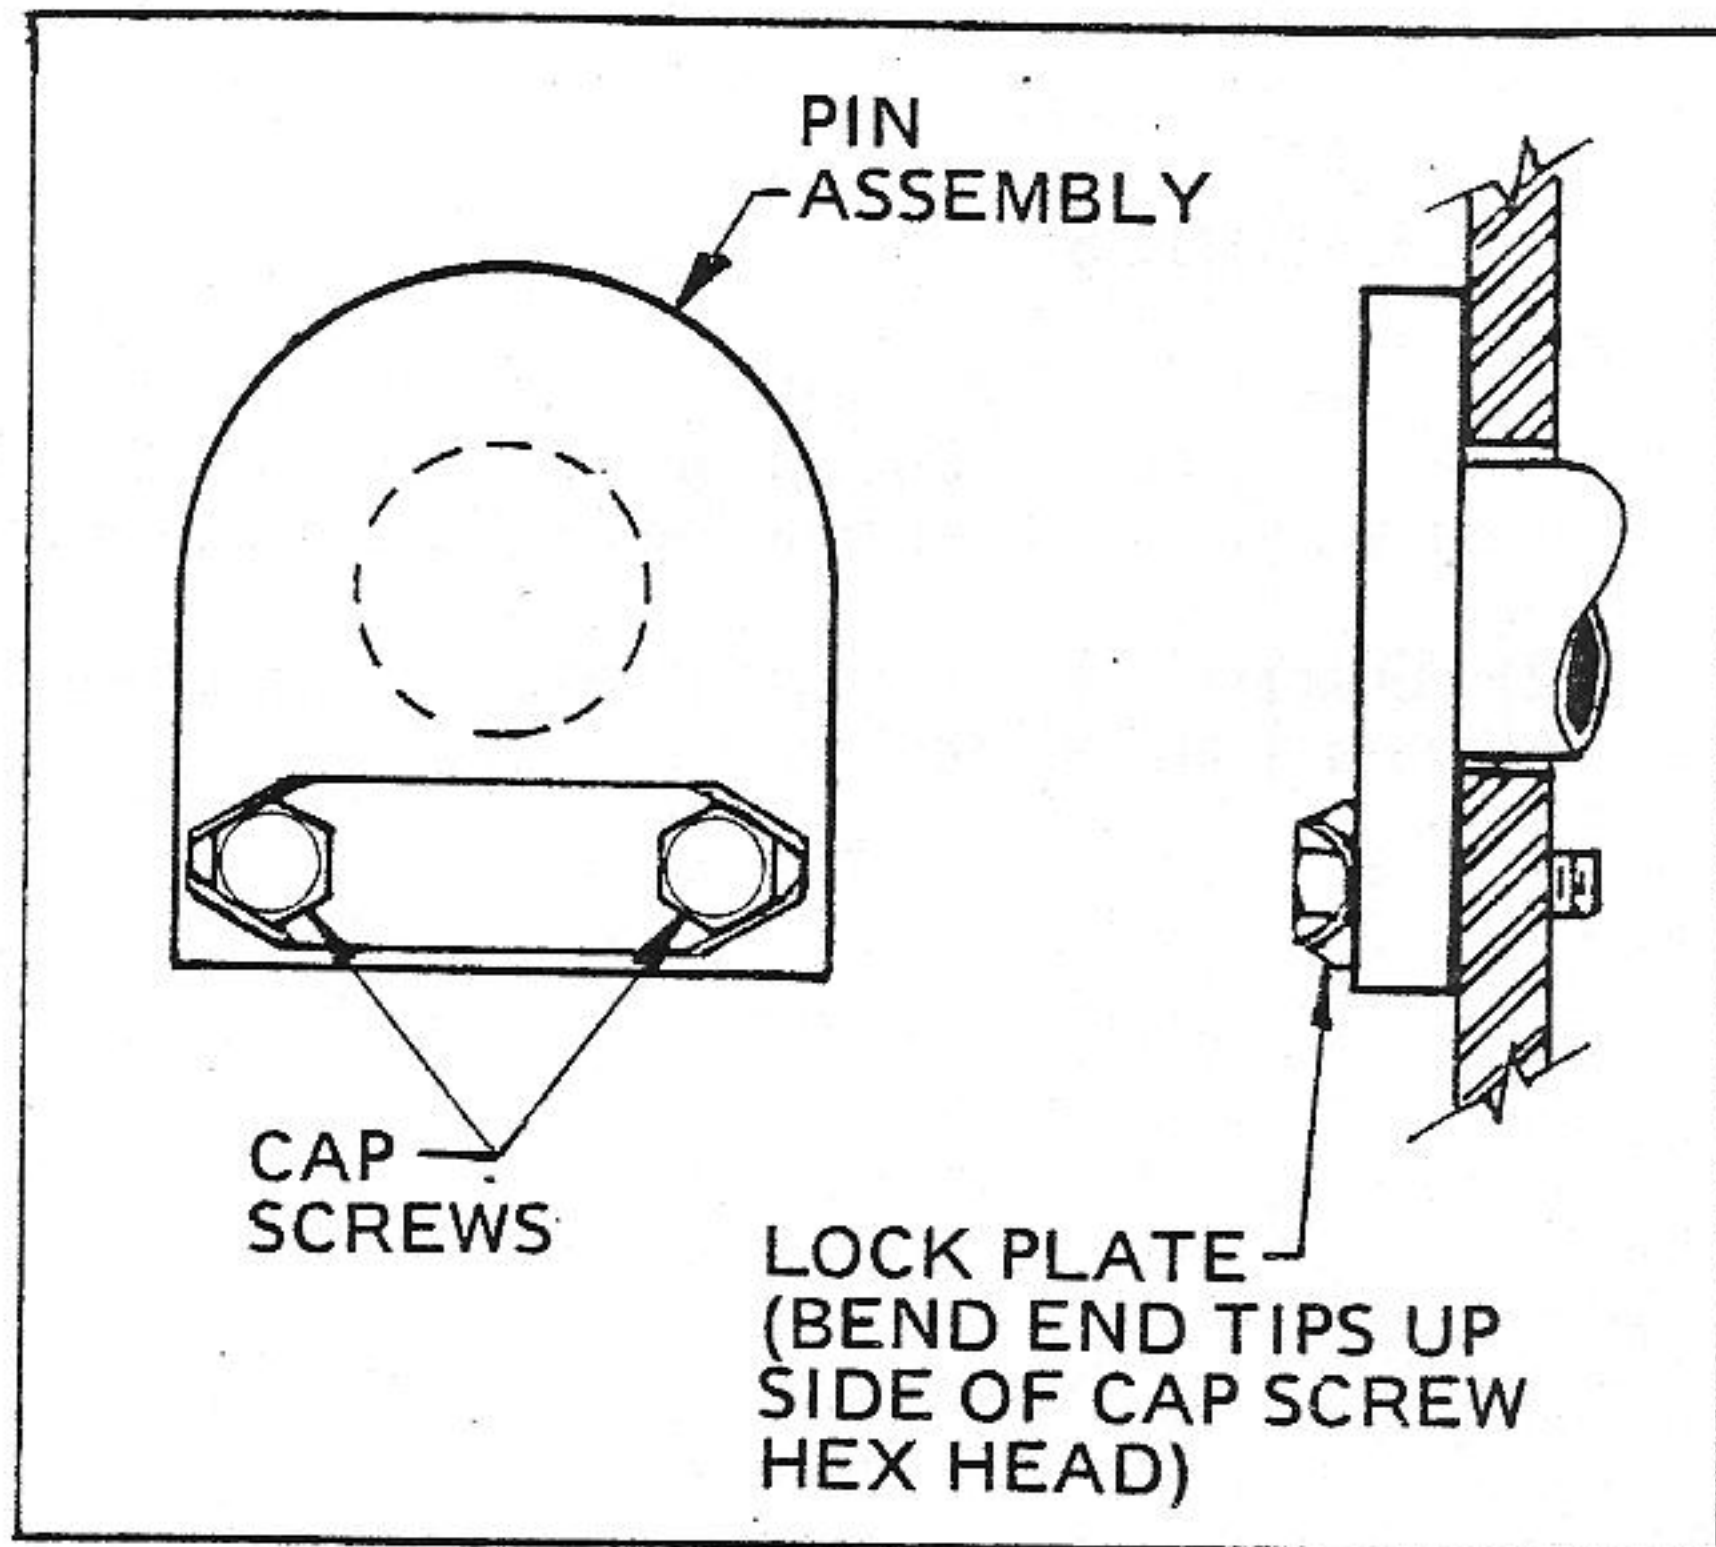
2. PROPER LOCK PLATE INSTALLATION
